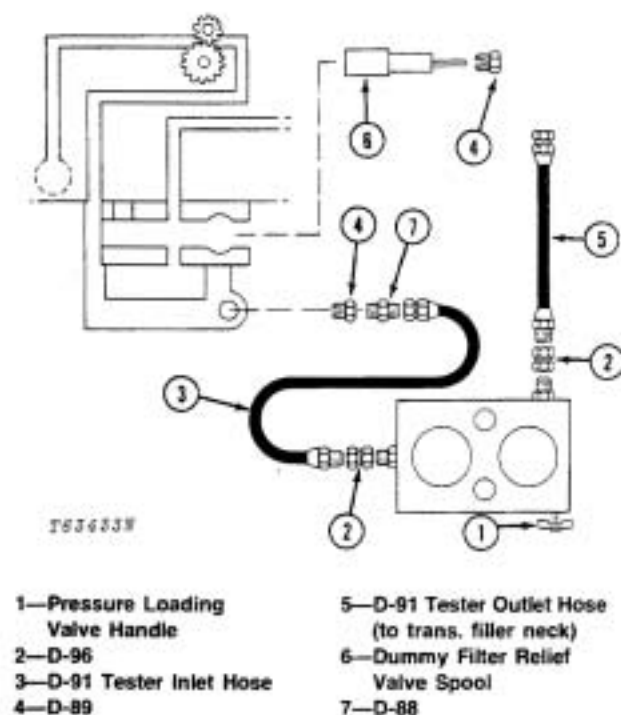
Transmission Oil Pump Test Using Nuday Hydraulic Tester
